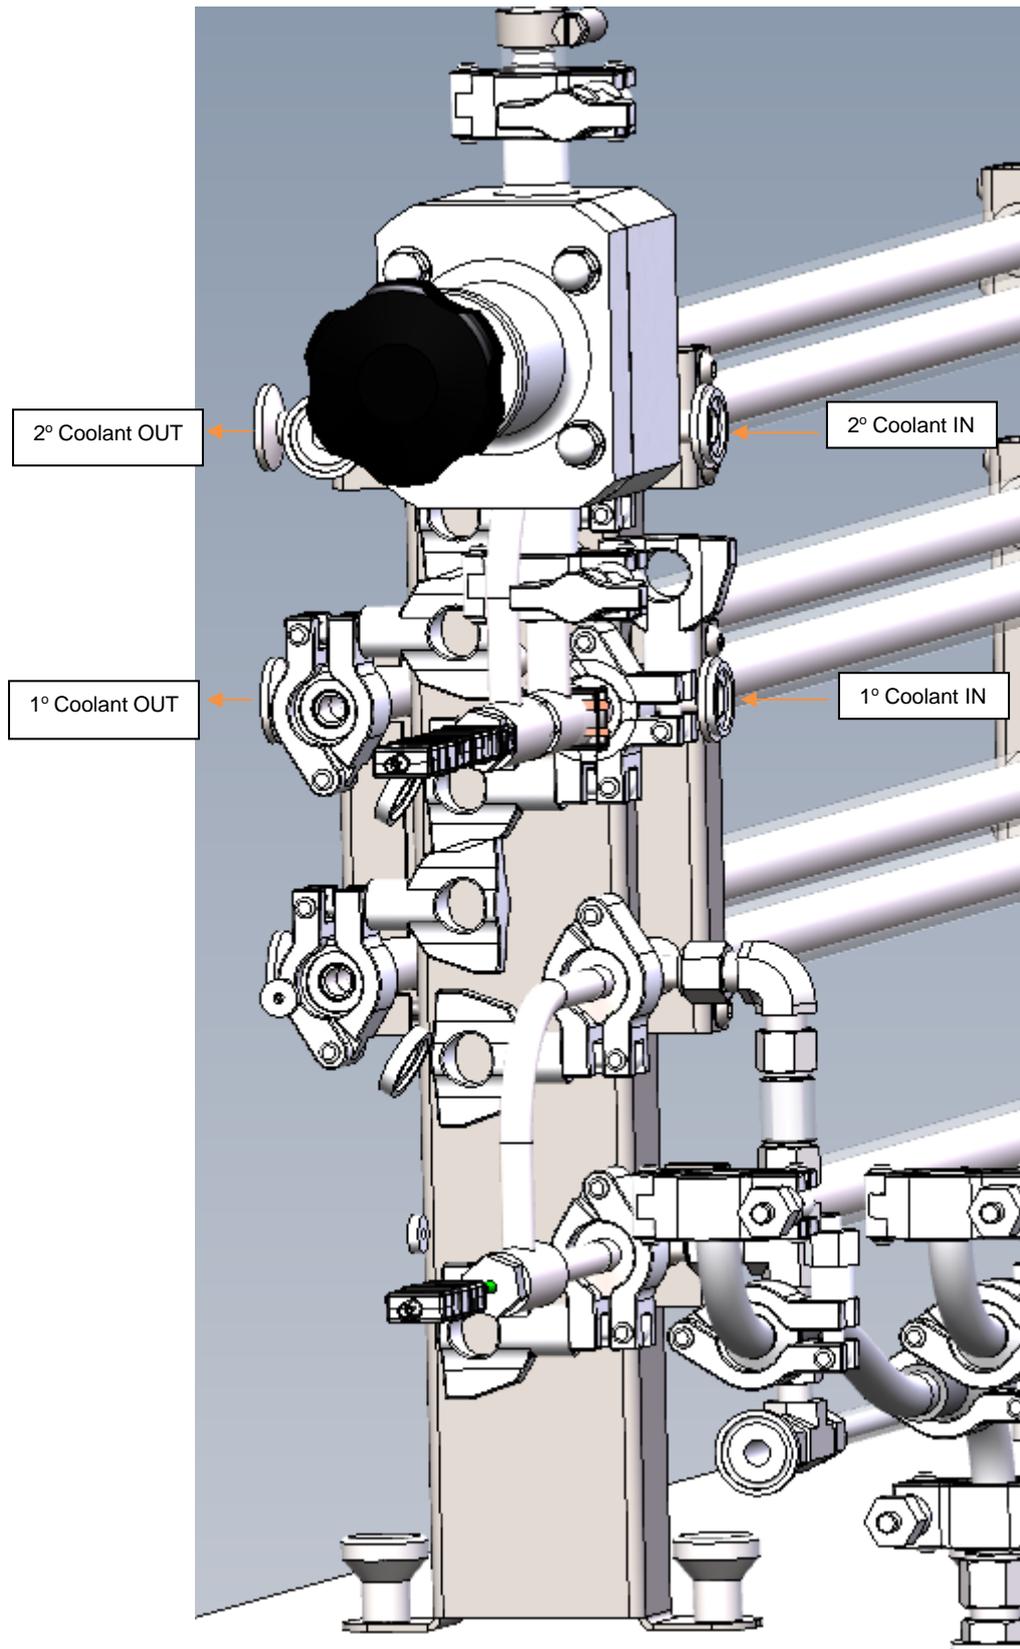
Primary and Secondary coolant connections for the tubular heat exchanger (FT74-24 option)
